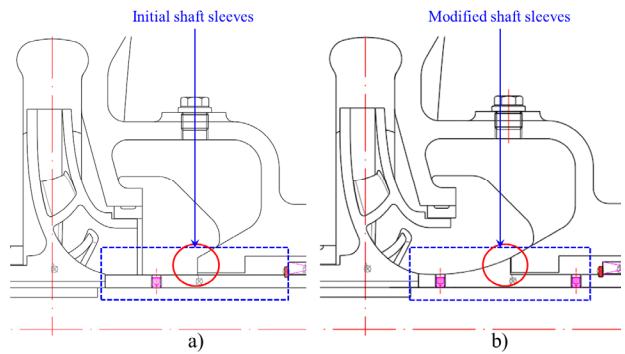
Cross-section view of two-stage centrifugal pump with a) initial and b) modified sleeves
